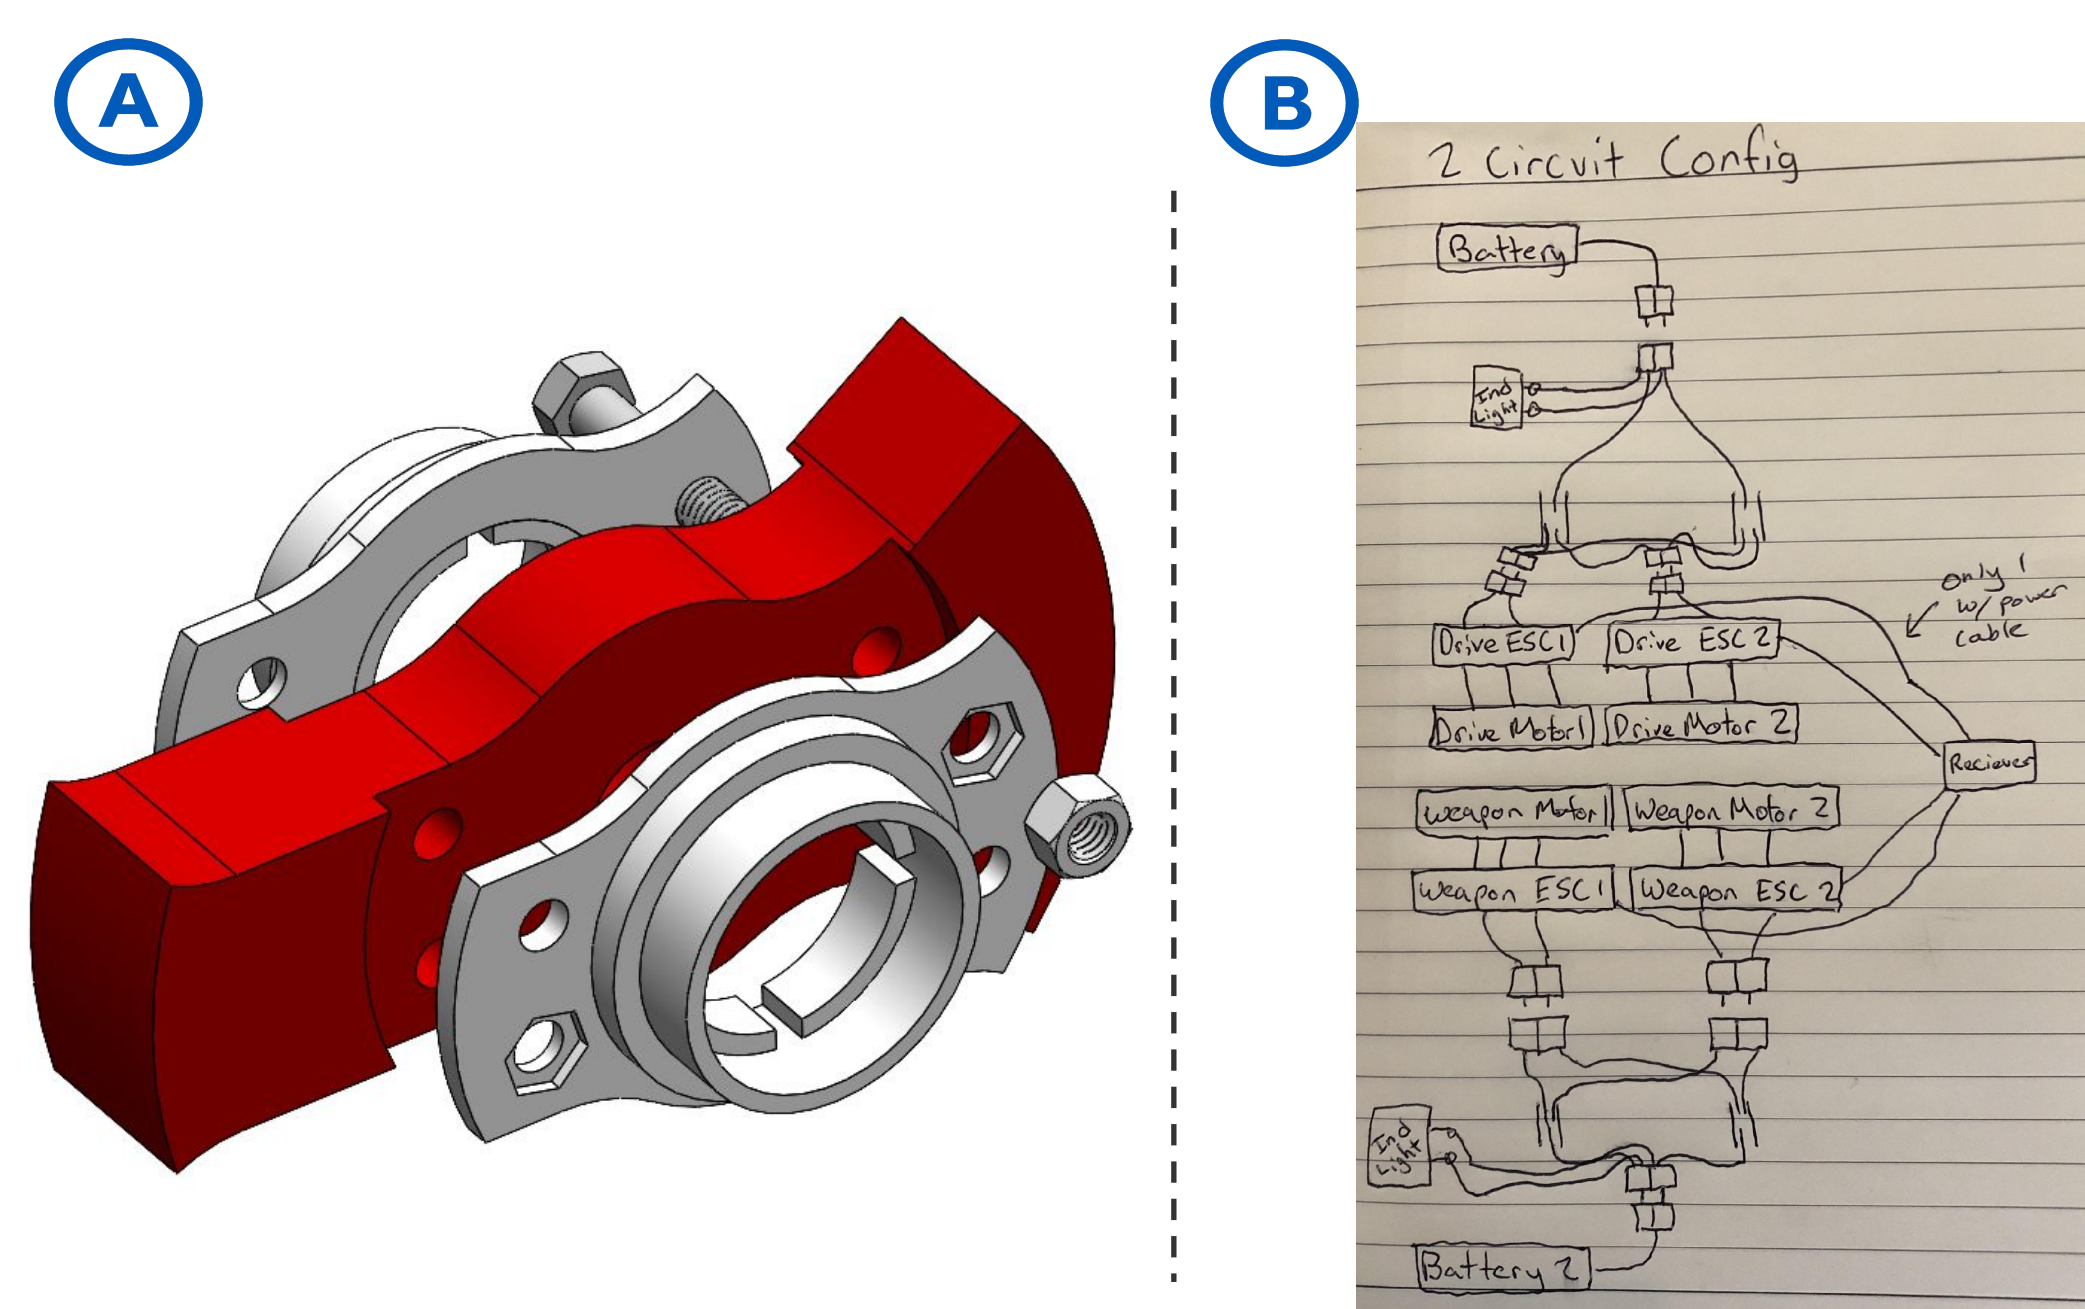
The Big Gig Weapon Assembly (A) and Electronic Block Diagram (B)
